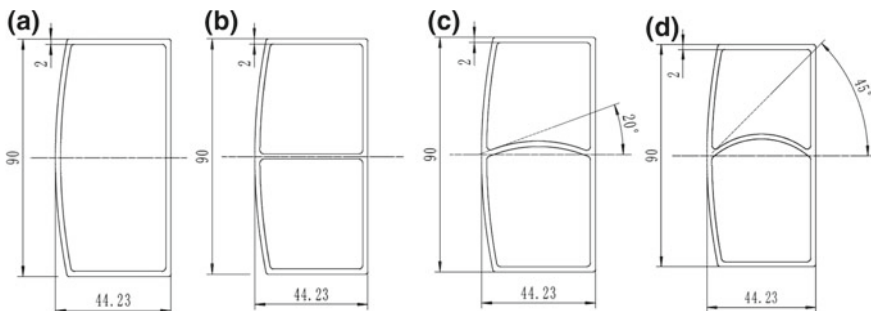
Four cross sections of 6082 aluminium alloy anti-collision beam: a the cross section with mouth shape; b the cross section with plane rib; c the cross section with 20-degree arc rib; d the cross section with 45-degree arc rib
